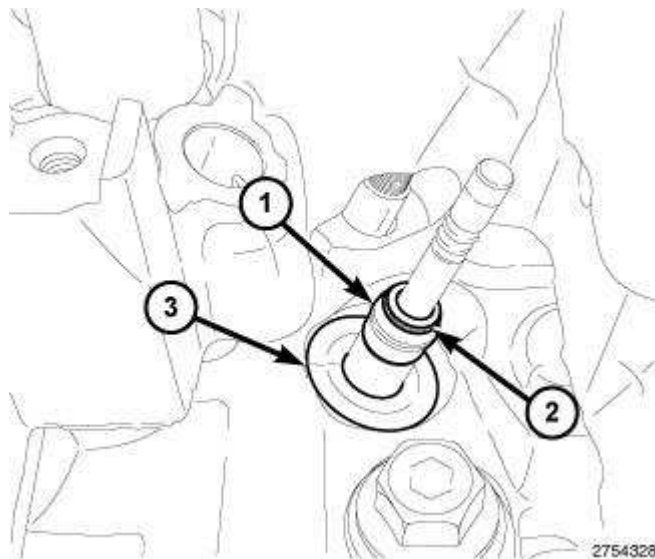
Spring Seat, Valve Guide Seal & Garter Spring
